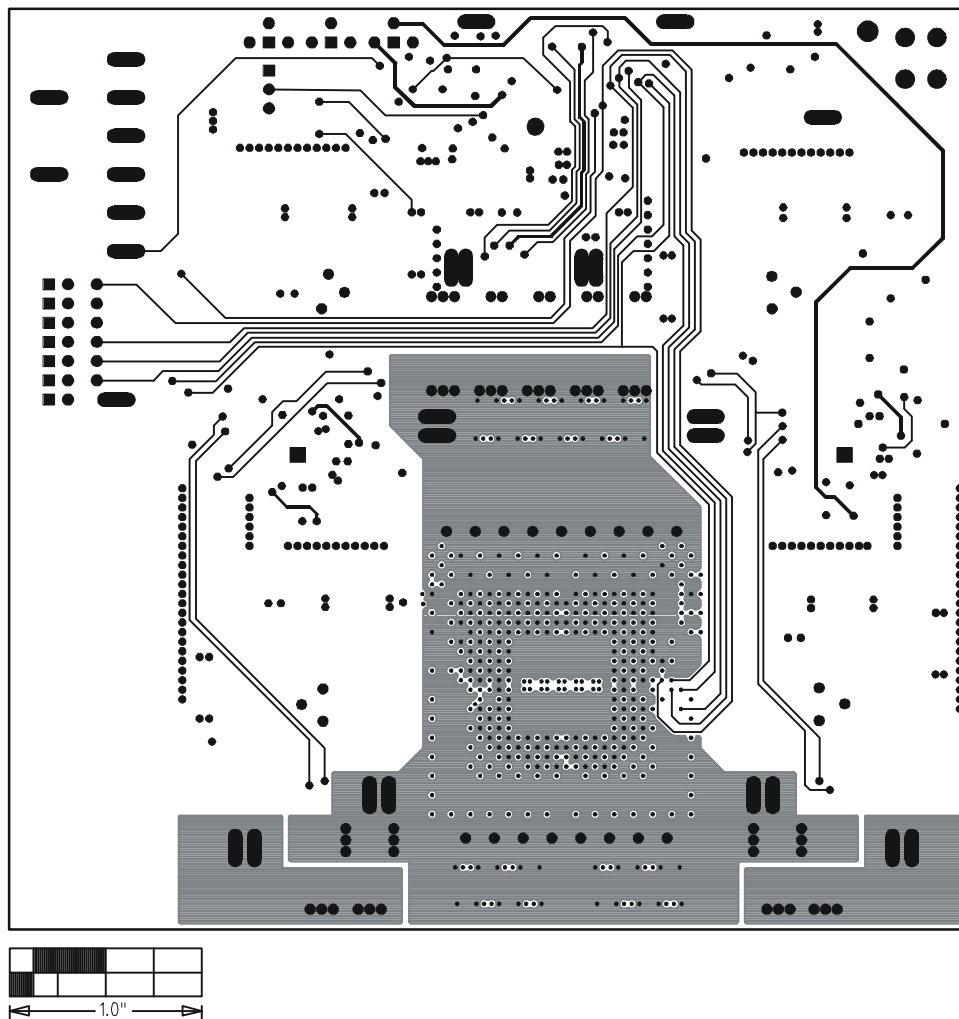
MAX1544/MAX1545 EV Kit PC Board Layout – Layer 6
